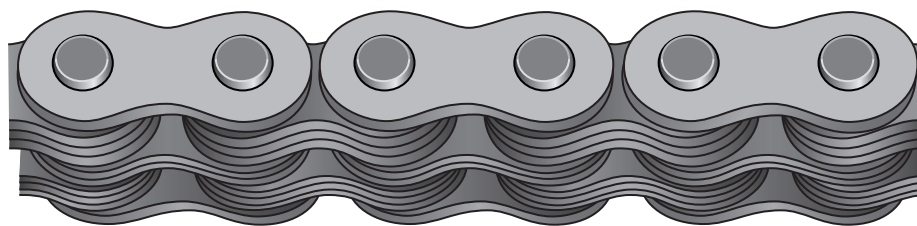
ASSEMBLY SHOWING 3×4 LACING
